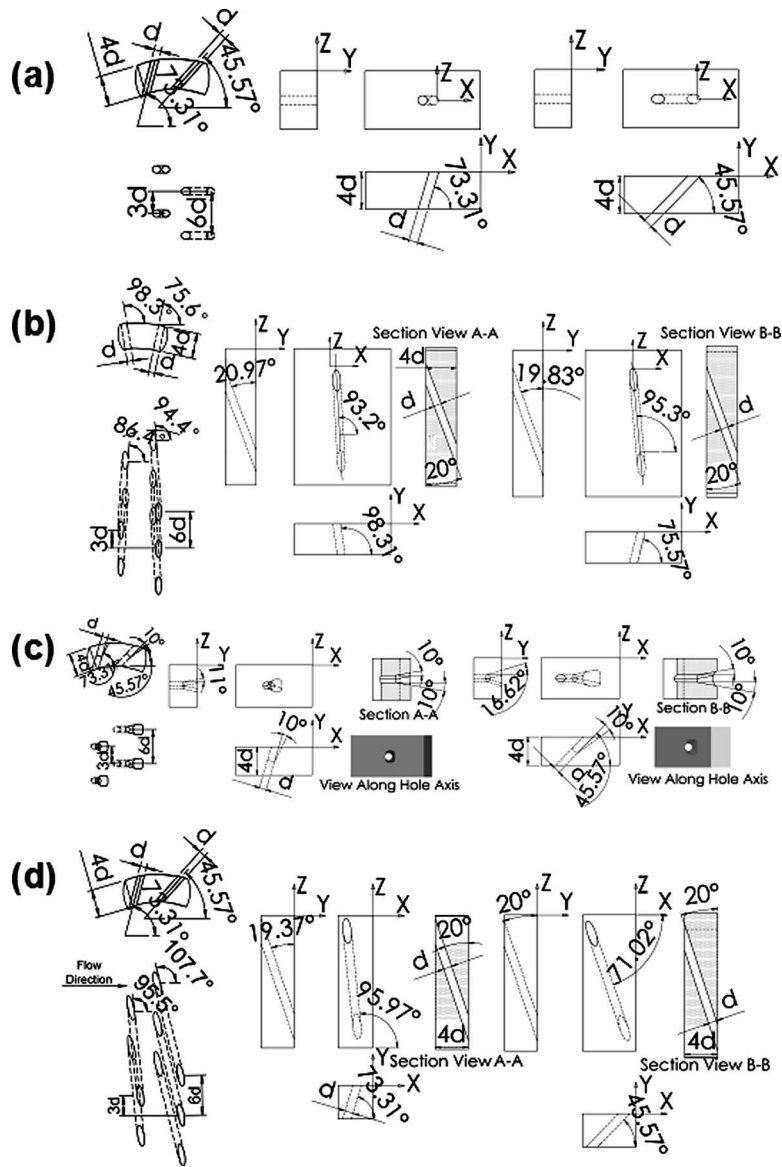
Film cooling hole configurations: (a) RA, (b) RR, (c) SA, and (d) RC
